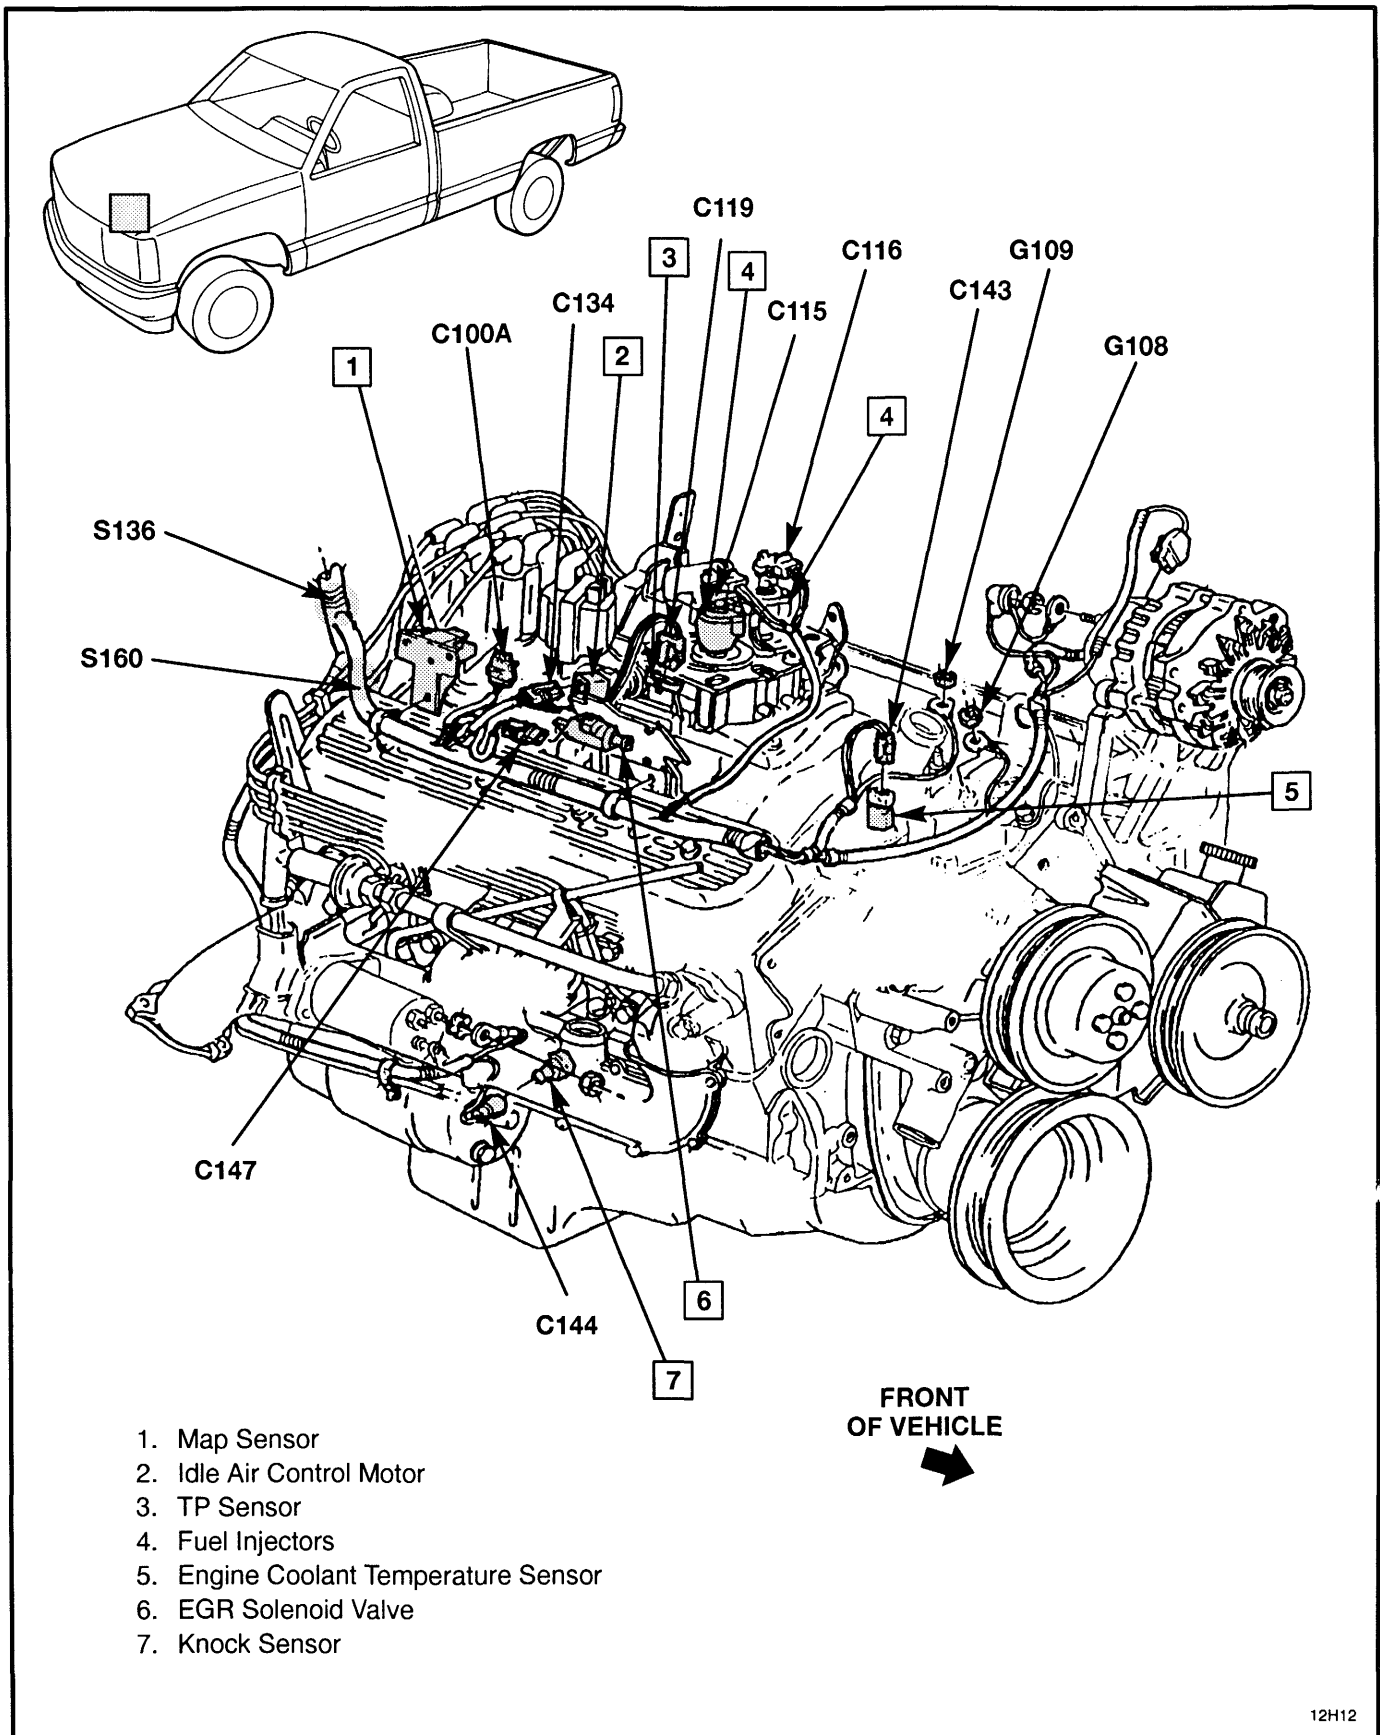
RH Side of Engine, 5.0L (305 CID) Engine — Gasoline
